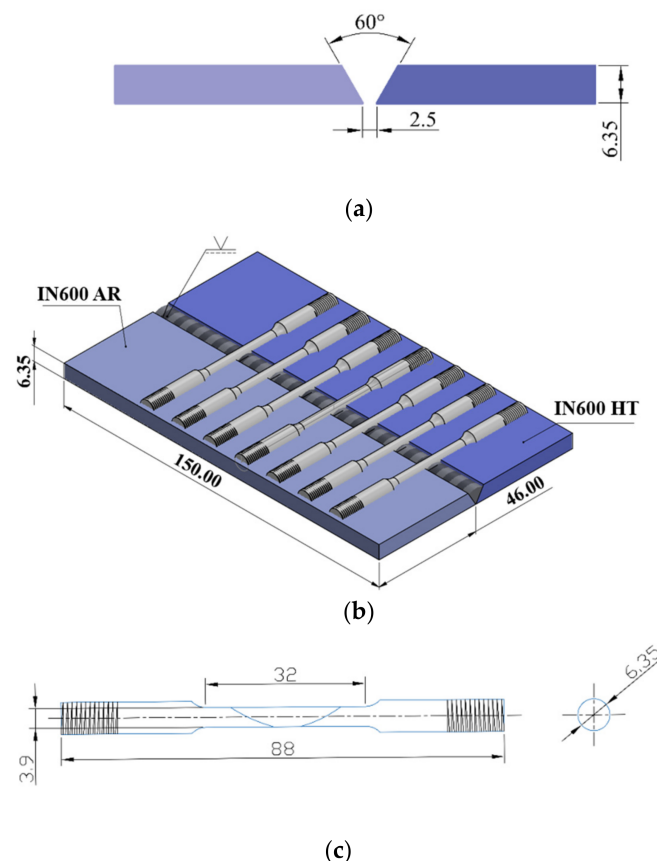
(a) Single-V groove joint design (b) schematic representation of the specimens machined for SCC and the (c) dimension and geometry of the SCC specimens. Dimensions in mm.
